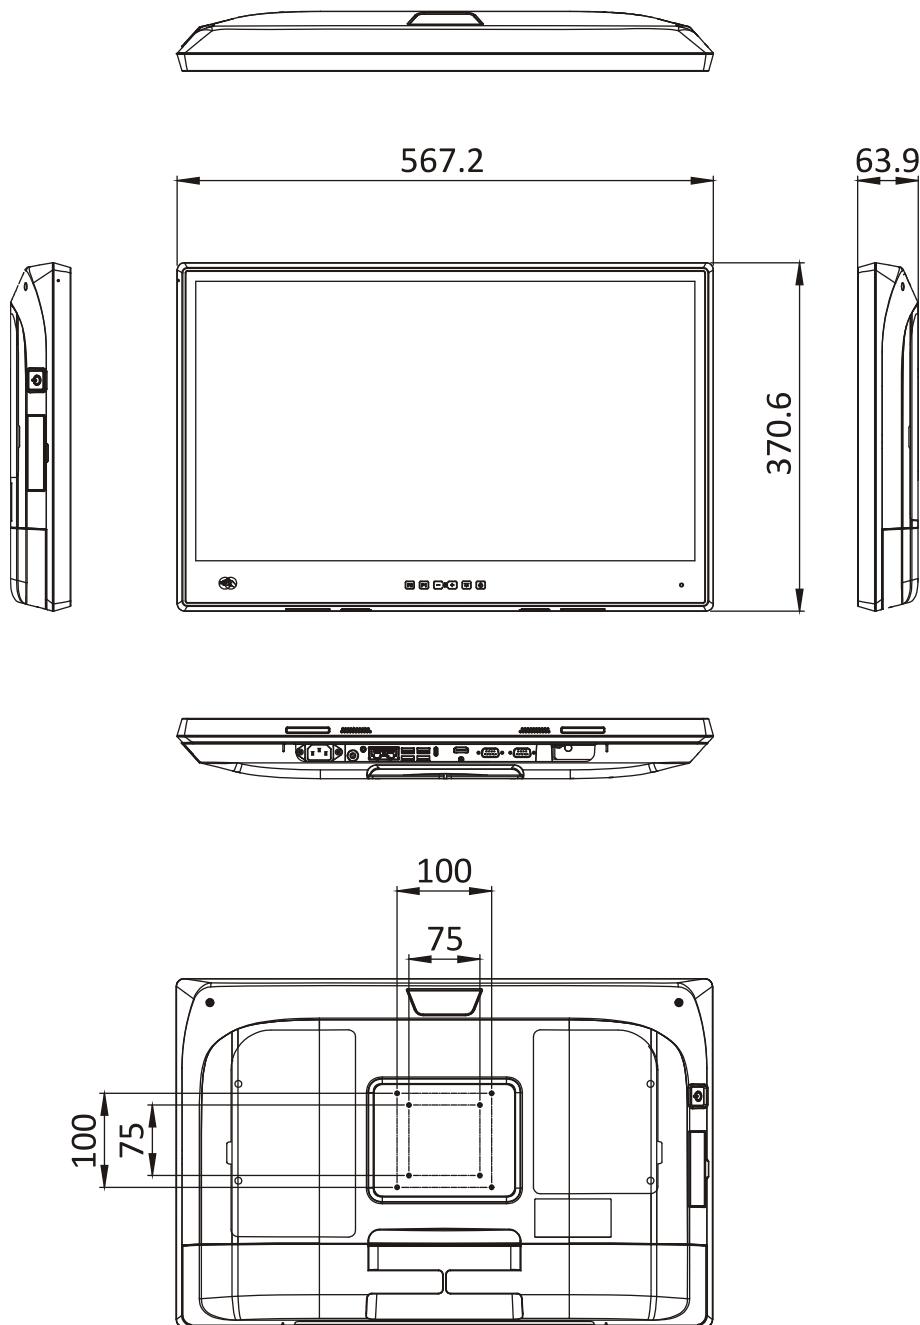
POCi-W24-RPL Dimensions (mm)
